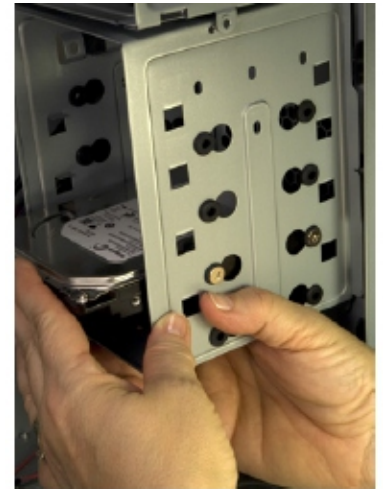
Slide the internal drive bay back into place and secure it with the three screws you removed earlier
